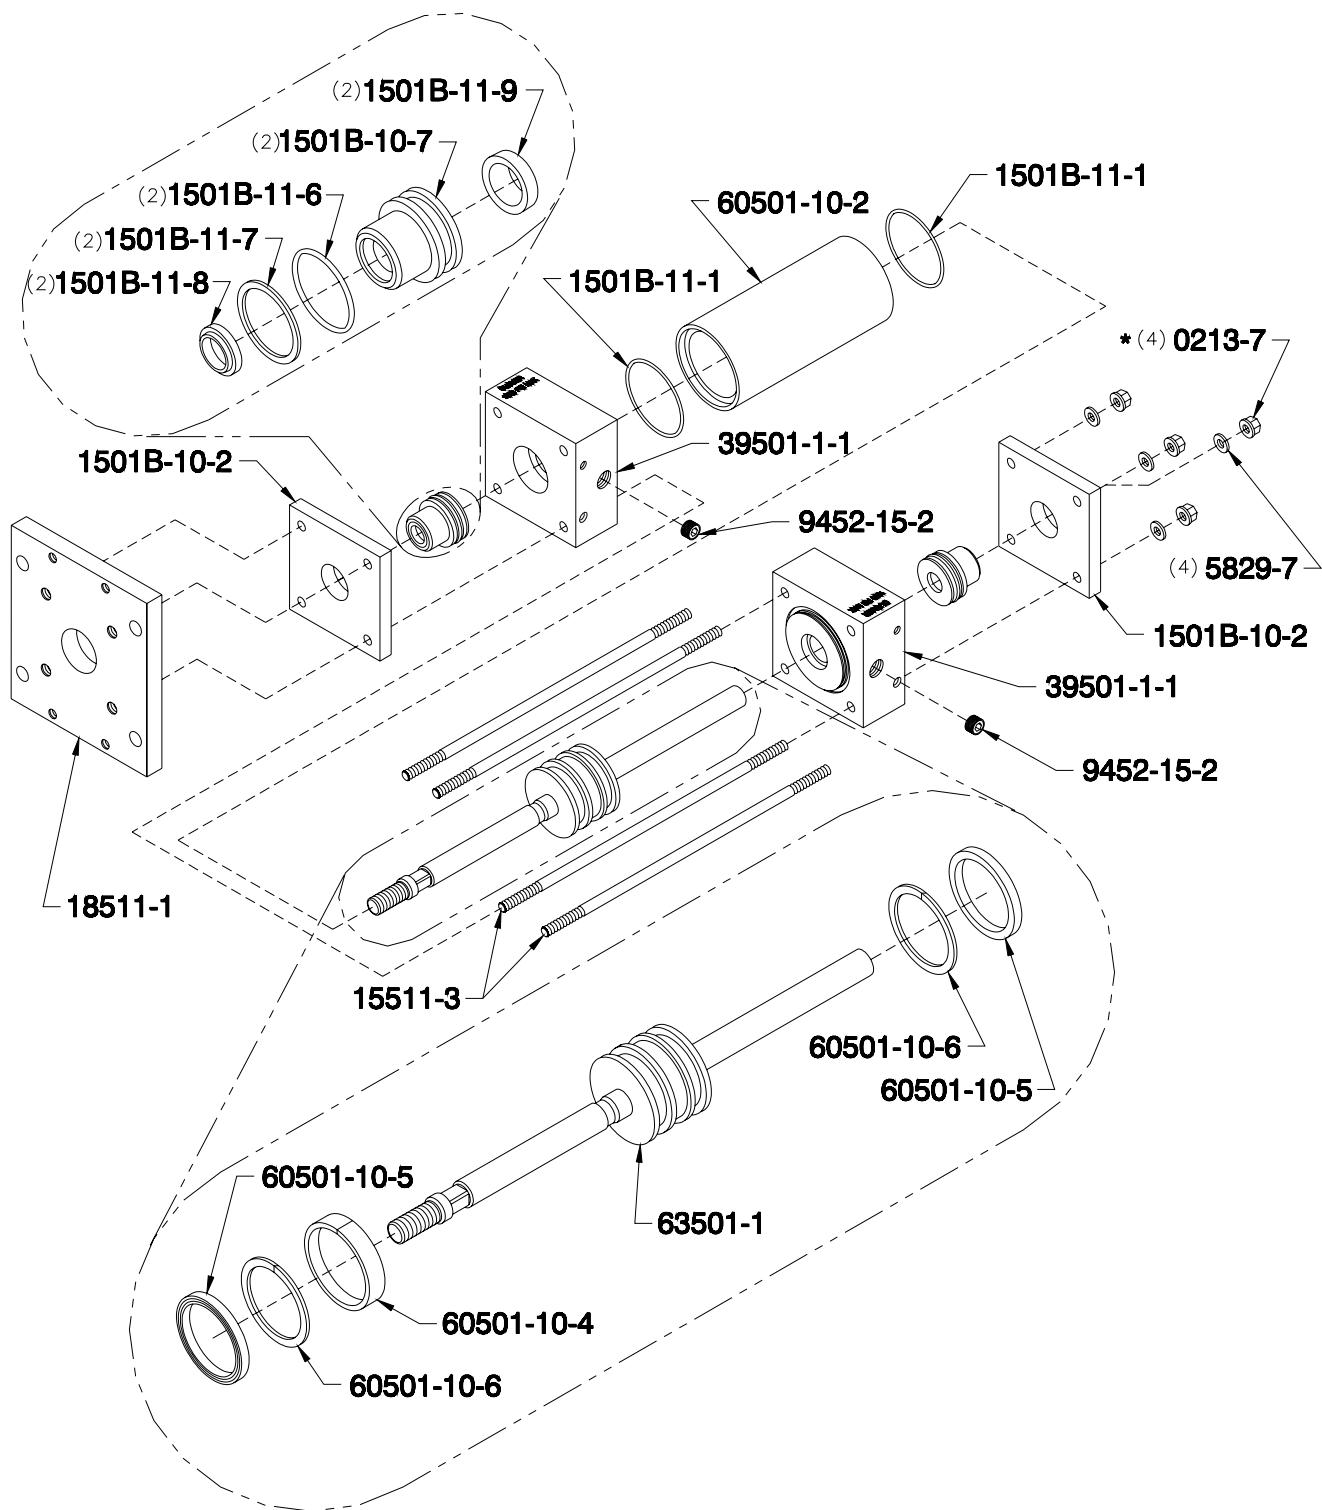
Hydraulic Cylinder (Part No. 63511), Exploded View
